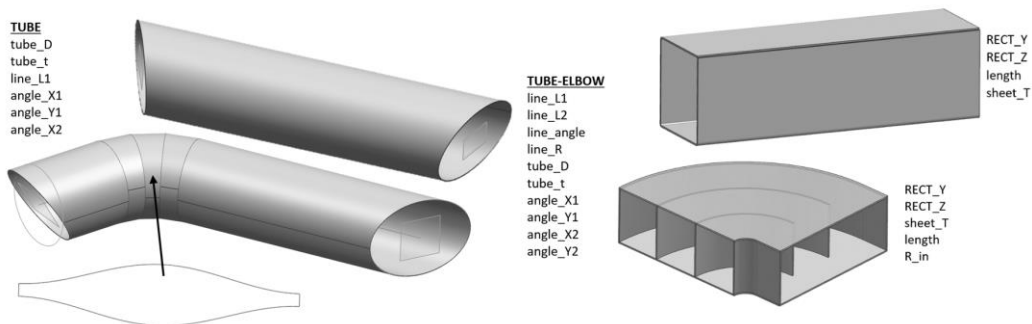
Parametrized model of a tube and an elbow and control parameters and demonstration of flat-pattern of one sheet
